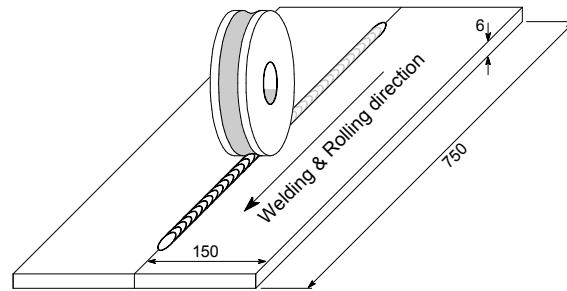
Schematic representation of PoWR on top of the weld bead with the grooved roller.
